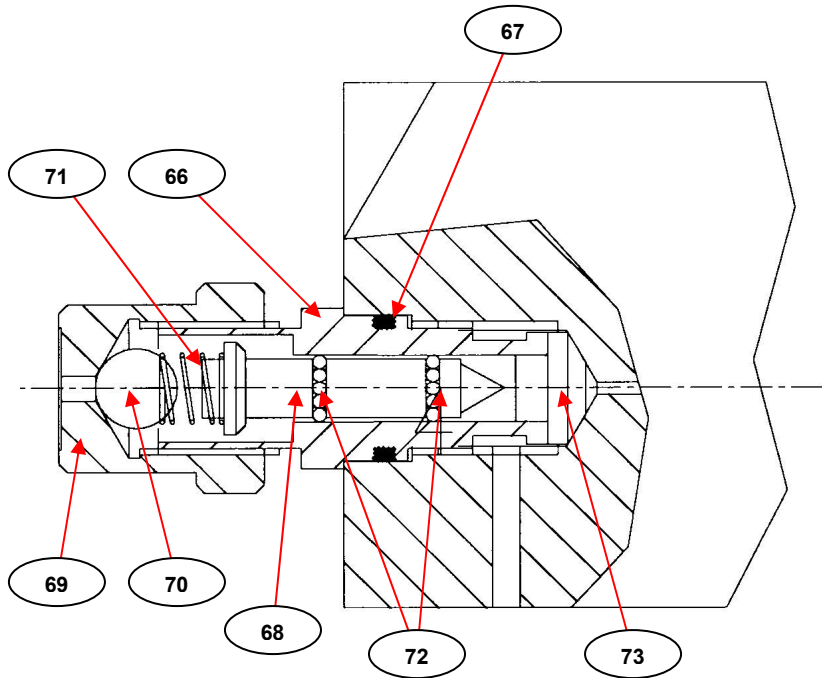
Side Cutaway View of Pressure Relief Valve Assembly
